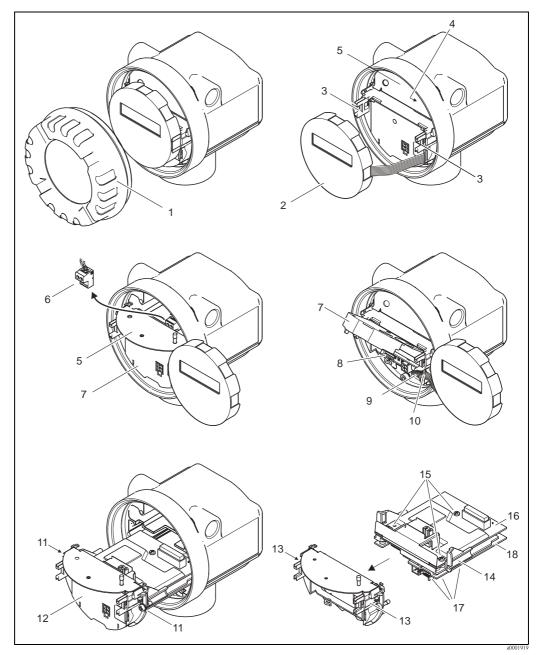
Installing and removing electronics boards, non-Ex/Ex-i version
